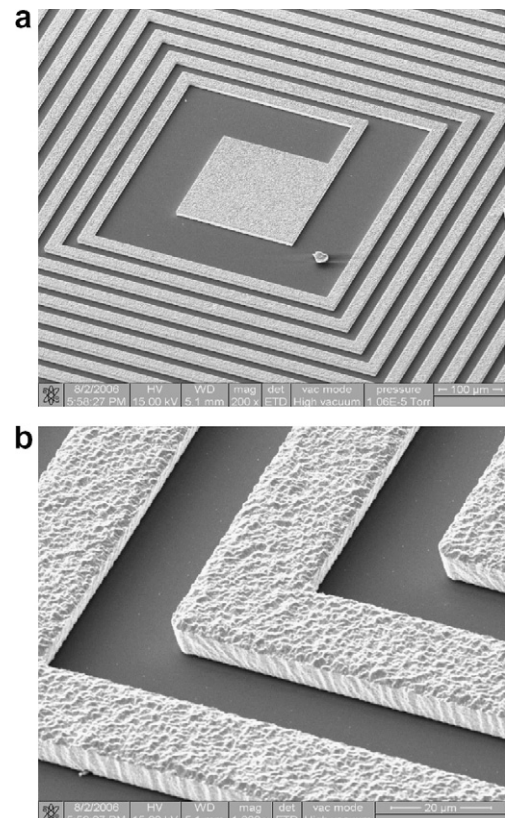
SEM pictures of the fabricated gold electroplated coil structure: (a) A magnified picture (200 $\times$); (b) a magnified picture (1600 $\times$).
